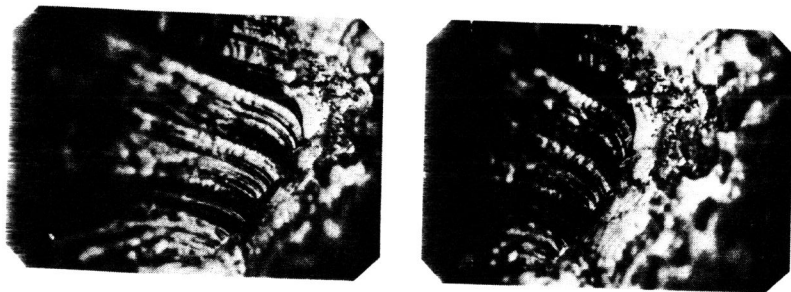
Stereofractograph of specimen fractured at 85 °K.
